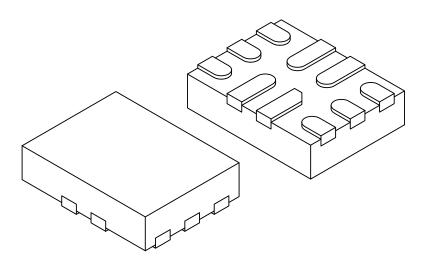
10-PIN, 1.6MM X 2.1MM QFN PACKAGE DIMENSIONS
